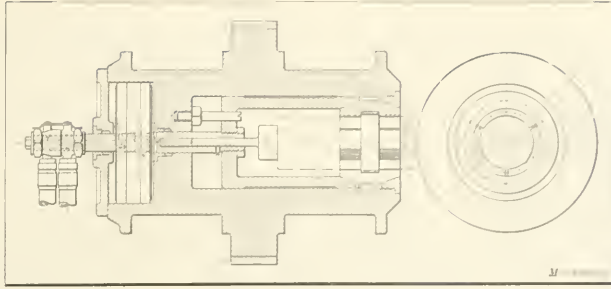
Spindle of Cutting-off Machine and other Machines of this Type
